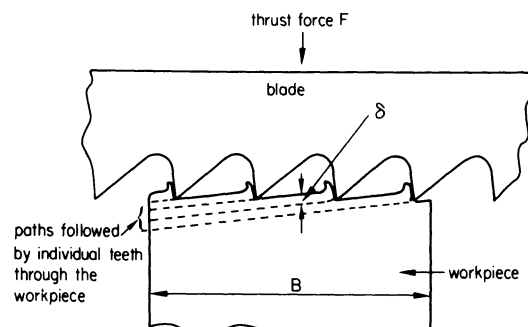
Cutting action of a hacksaw blade showing the method of material removal.
